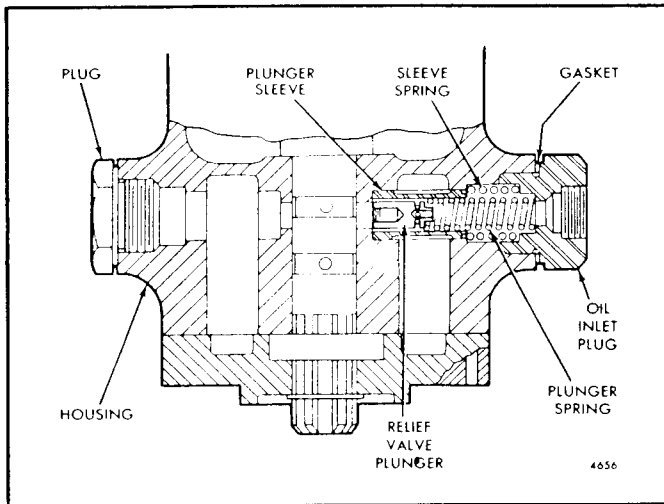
Location of Oil Relief Valve Plunger, Plunger Sleeve, Springs, Oil Inlet Plug and Dummy Plug in Governor Housing (R.H. Governor Shown)
